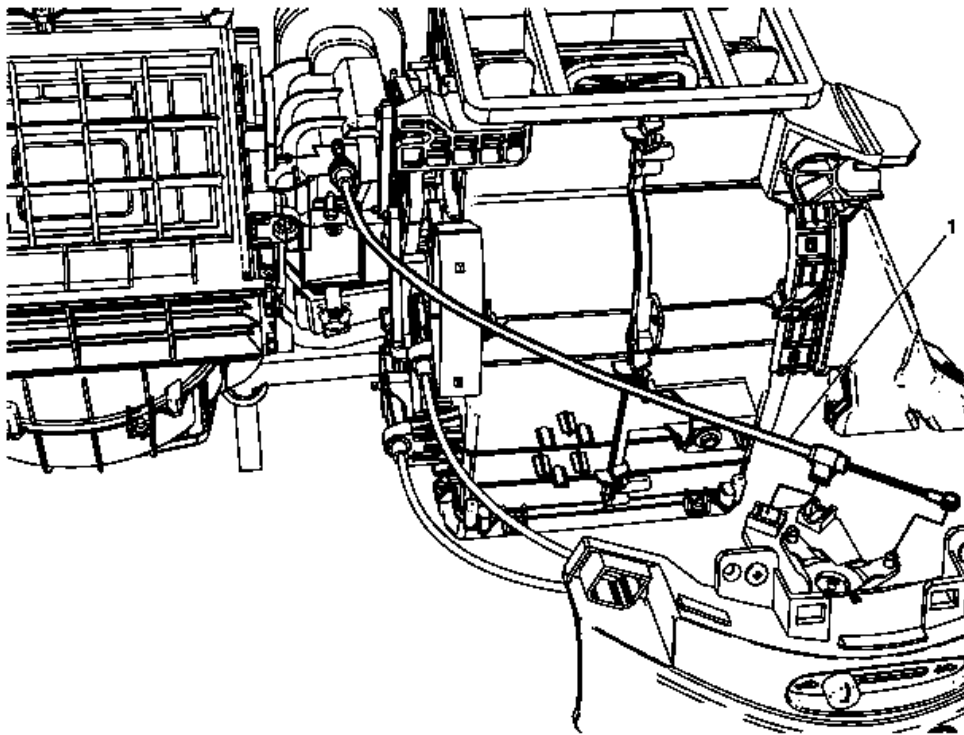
Inside Air Recirculating Control Cable (Right Hand Drive)
